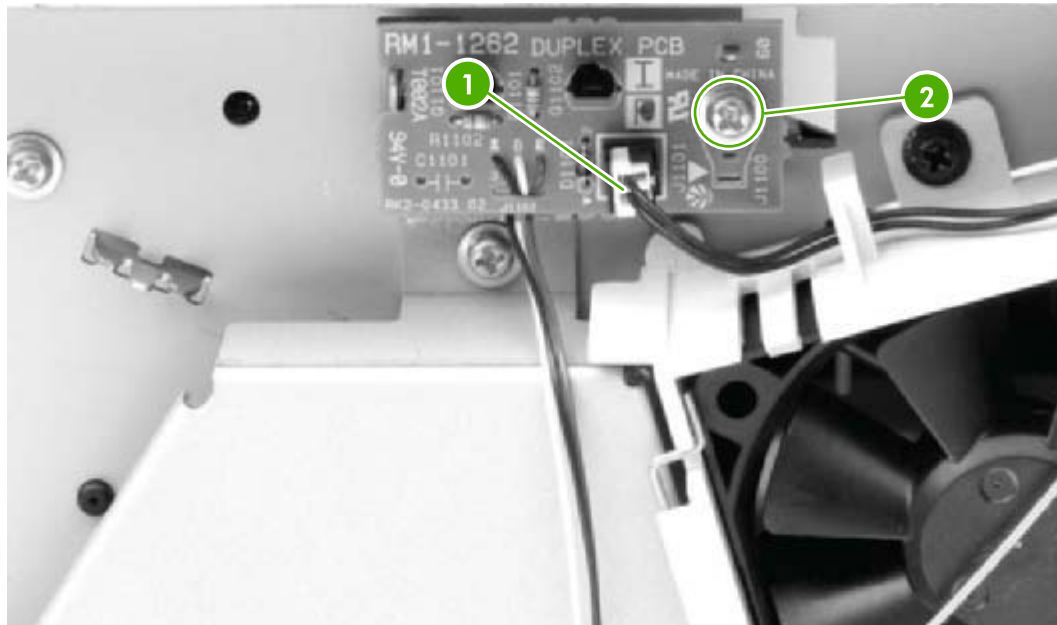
Removing the duplex-drive PCA (2 of 2)
